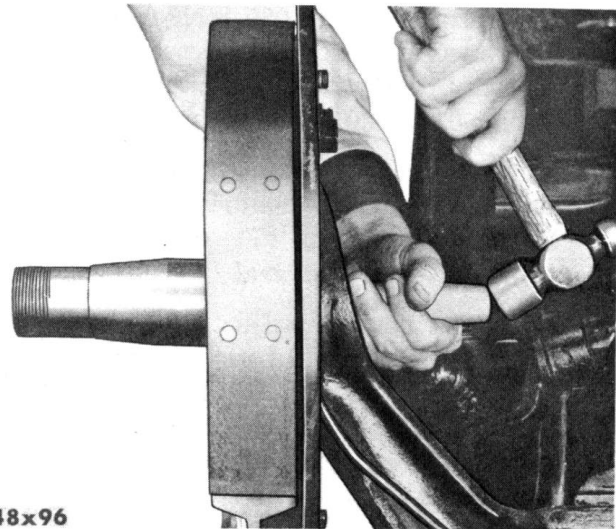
Installing Rear Wheel Drive Shaft Small Seal
